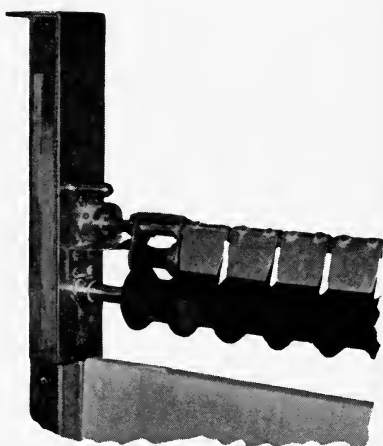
Close-up of upper shaft wiping device, and guide roller.
